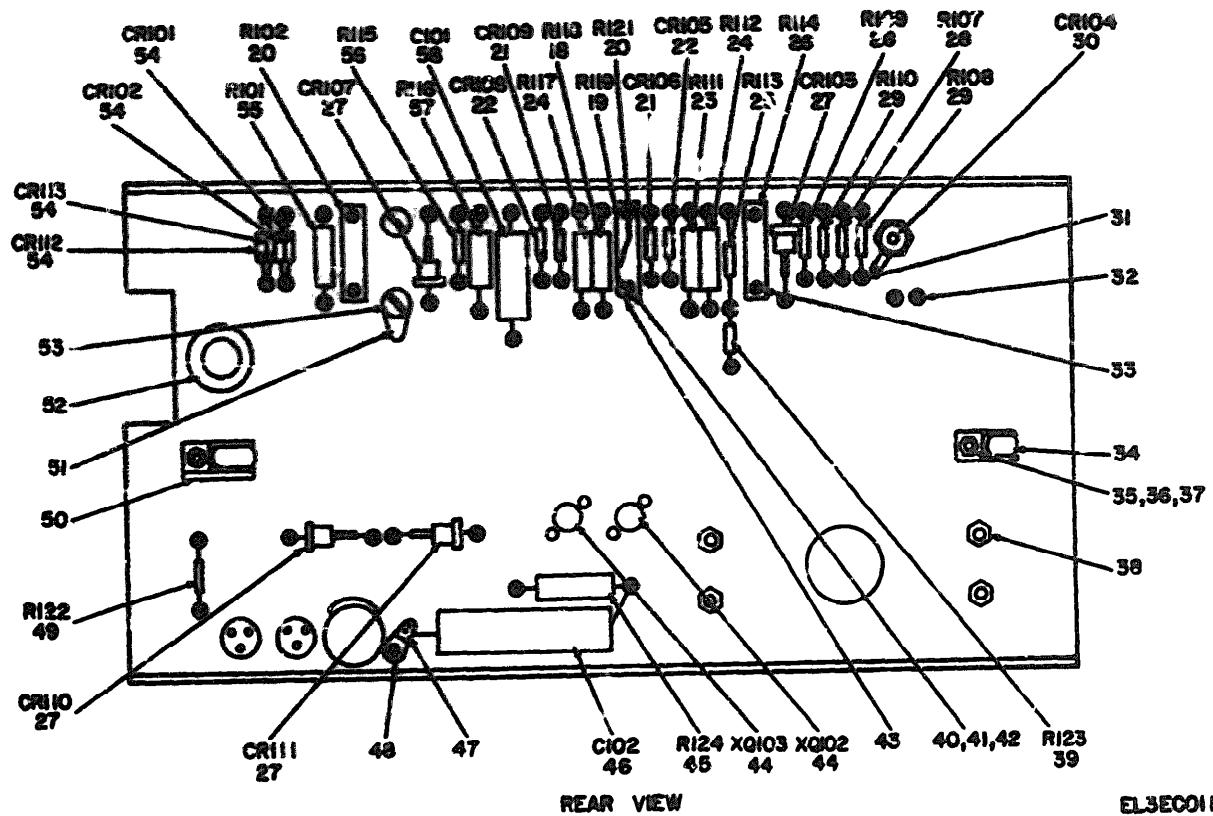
Bracket and Component Assembly (A1A1A6) (Sheet 2 of 2).
